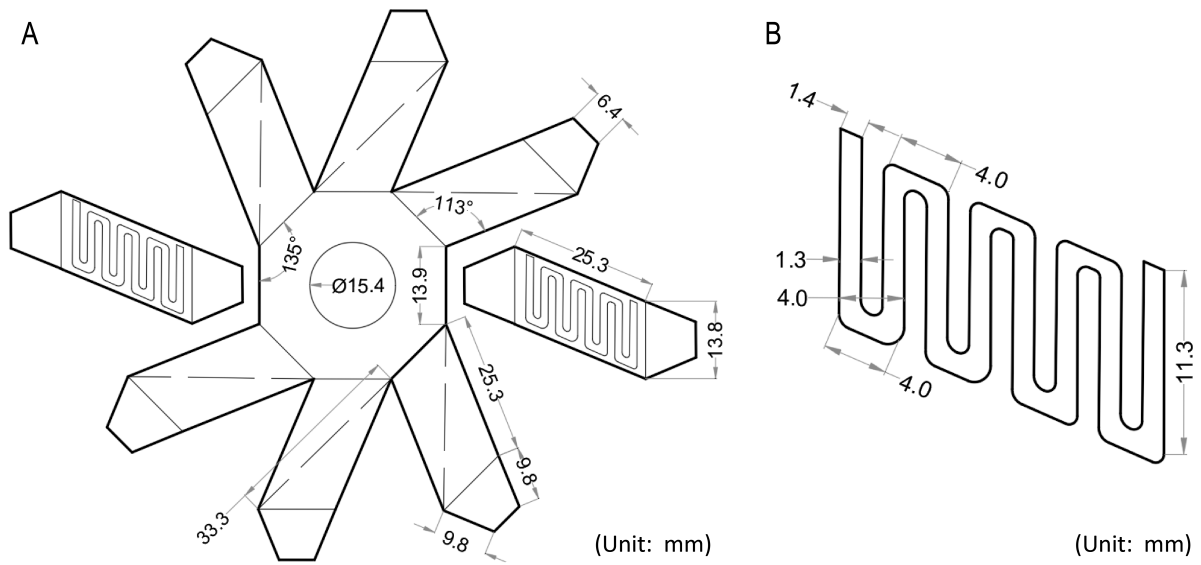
(A) Kresling pattern design with dimensions labeled (Unit: mm). (B) AgNW heater design with dimensions labeled (Unit: mm).
